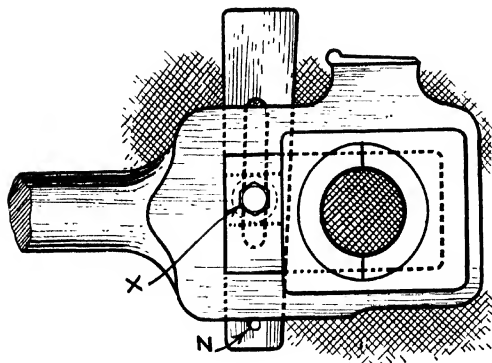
FITTING CONNECTING-ROD BEARING ADJUSTMENT
